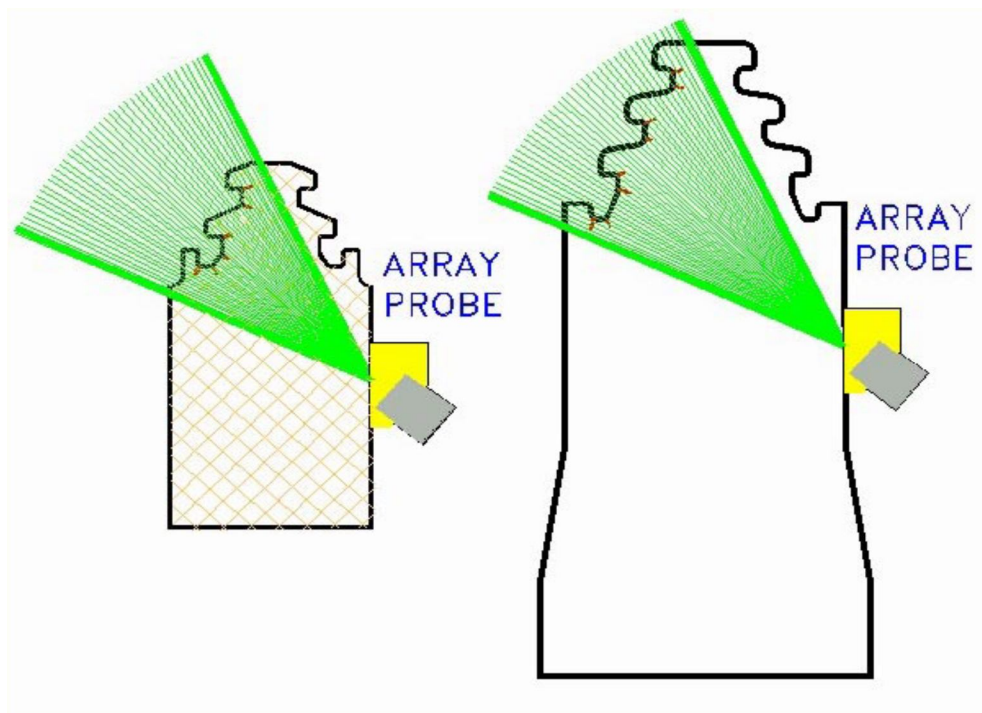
Schematic view of Root attachment geometry and inspection technique
